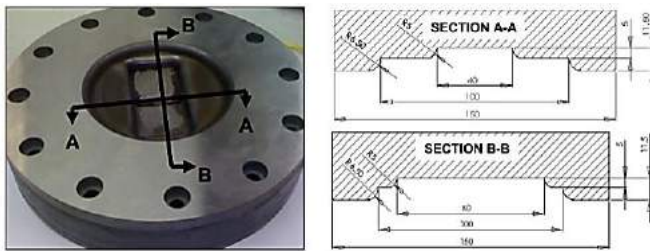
Closed-die geometry and dimensions taken as reference from [7]
